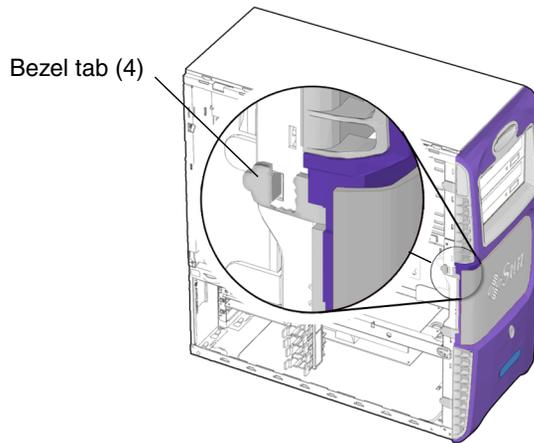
Releasing the Bezel Mounting Tabs
